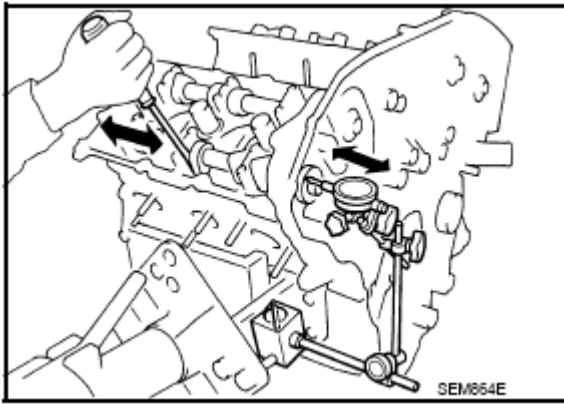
Measuring Camshaft End Play Using Dial Indicator
